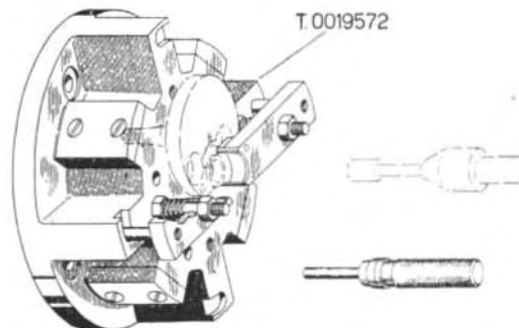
Grinding out the crankweb holes for o/s size crankpins.
